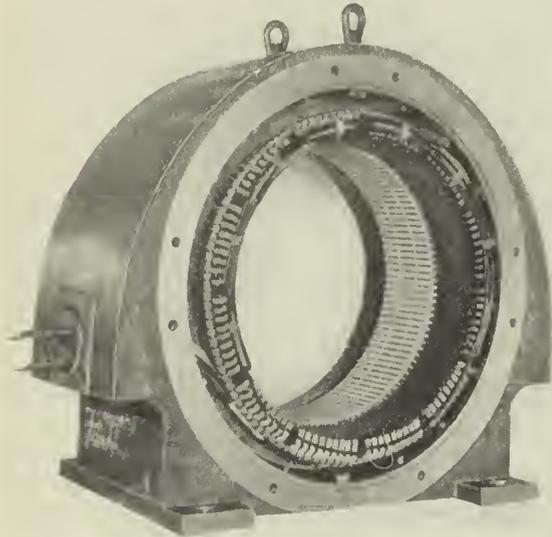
Fabricated Protected Type Stator Complete with Stator Winding for 175 h.p. Squirrel Cage Induction Motor.
